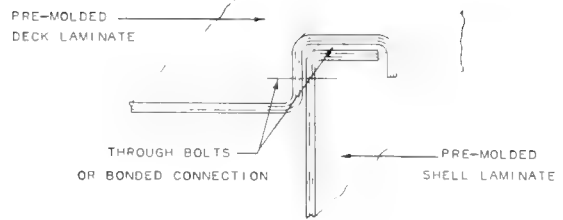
Deck Edge Connection - Simple Molded-in Coaming with Mechanical Fastenings
